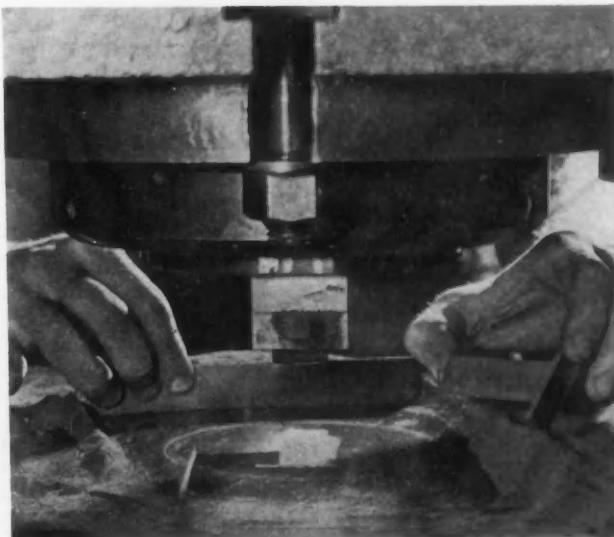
Molding iron powder into a turbine blade. Note the completely molded part being held at right
